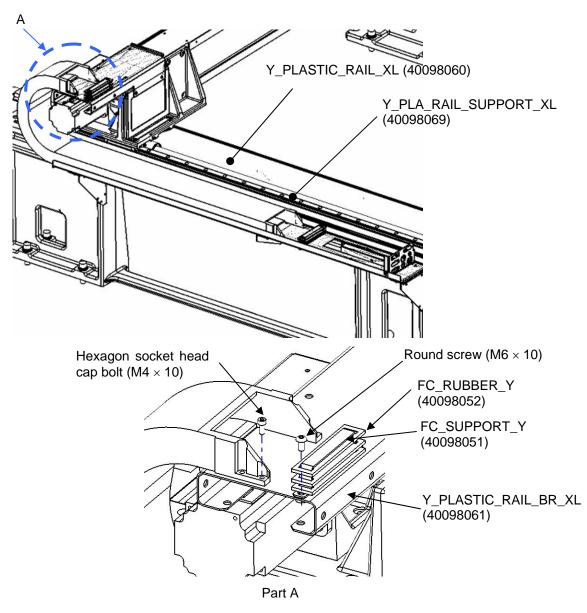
Y-Axis Cableveyor (XL Board Specifications)
